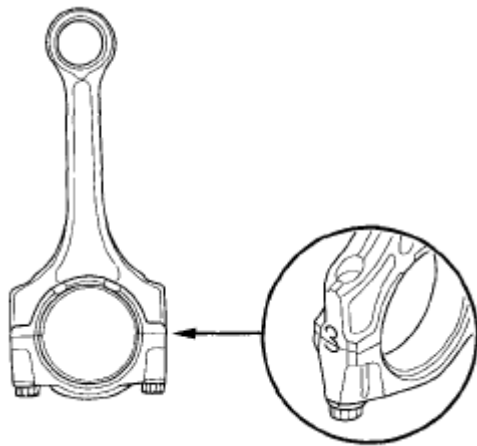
Identifying Connecting Rod Big End Bore Code Locations
